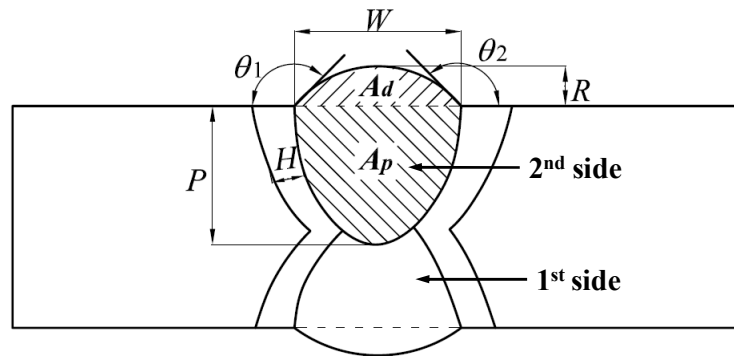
A schematic diagram of a typical SAW welded butt joint with no bevel or gap.
